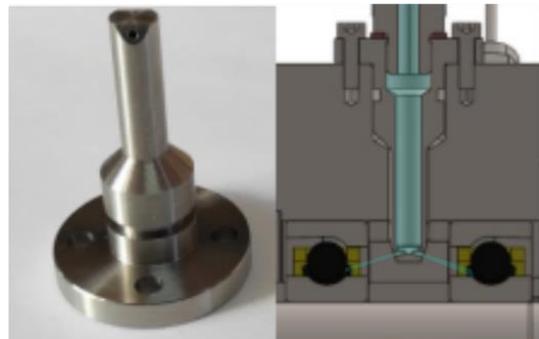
An oil injector besides a cut-away vision of the assembly.
